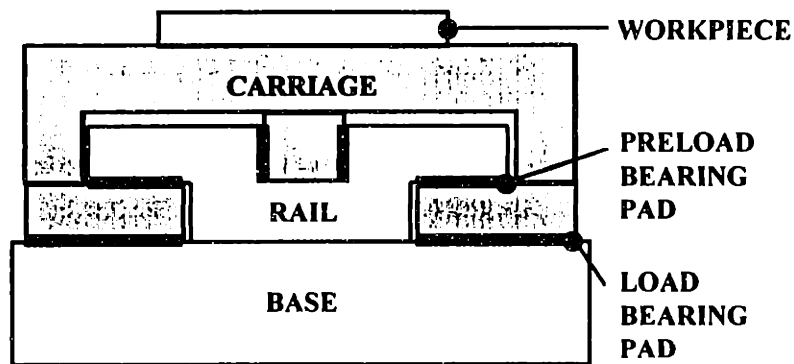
Diagram of machine tool axis with hydrostatic Bearing Pads
